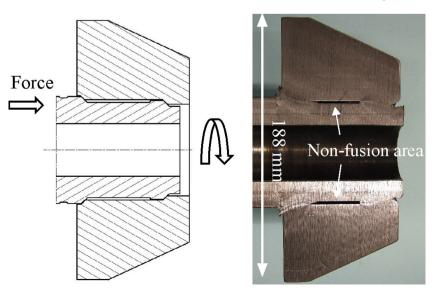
Initial design of JSS FW for drive pinion (left side before FW, right side after FW).
